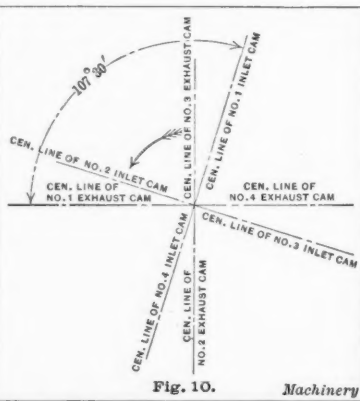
Diagrammatical End View of a Four-cylinder Engine Cam-shaft
